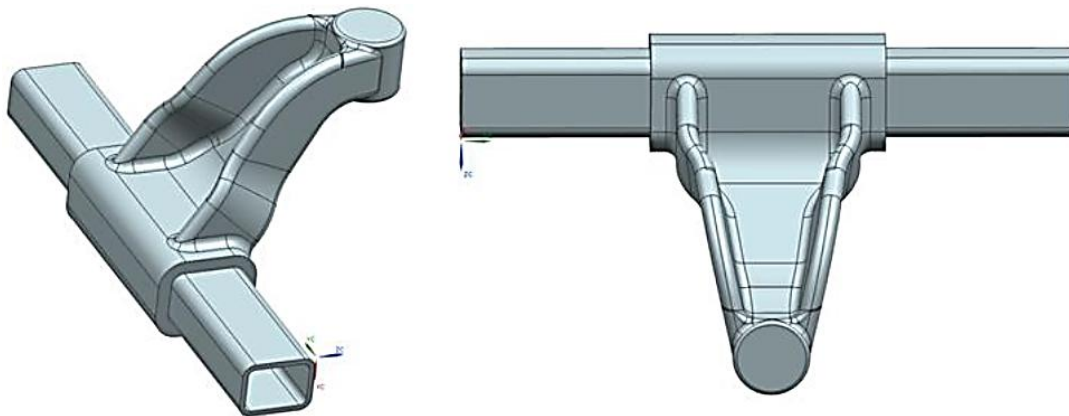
CAD drawing of the redesigned hybrid left front cradle mount middle.
